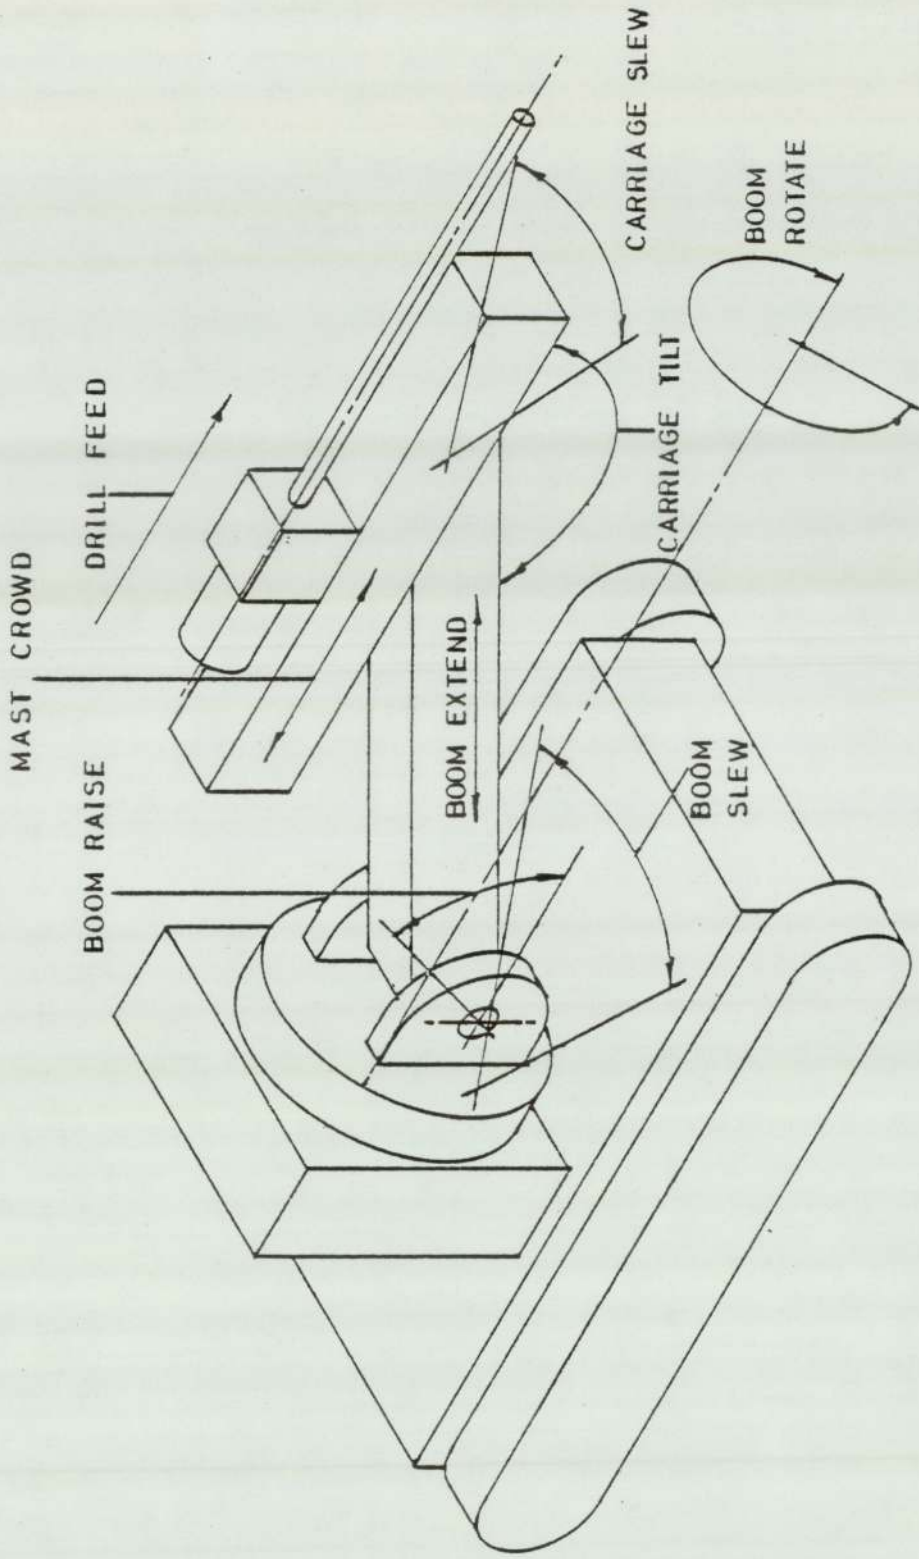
BOOM MOUNTED DRILLING MACHINE DEGREES - OF - FREEDOM.
